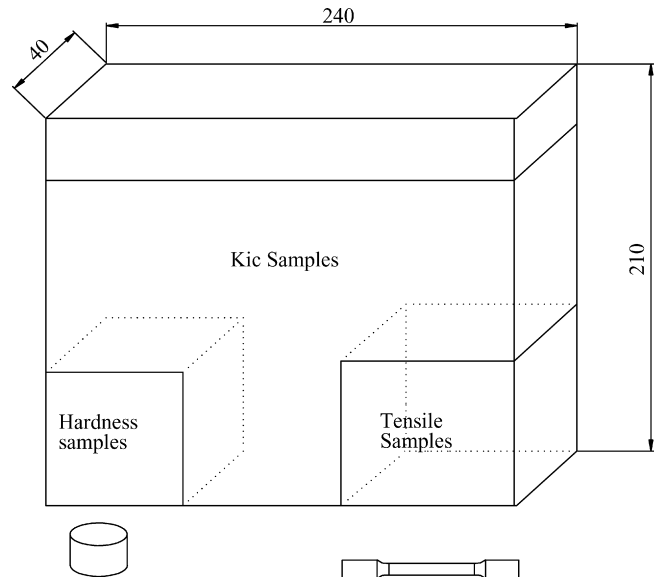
Dimensions of plate type casting showing location of samples machined out for mechanical tests.
